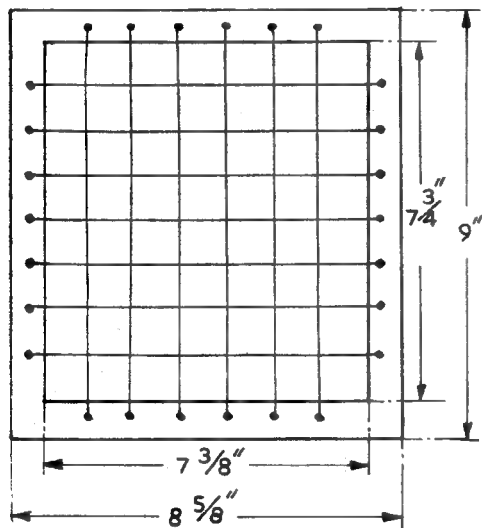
Front of single footlight, showing crosswire assembly. (For holding gelines)
